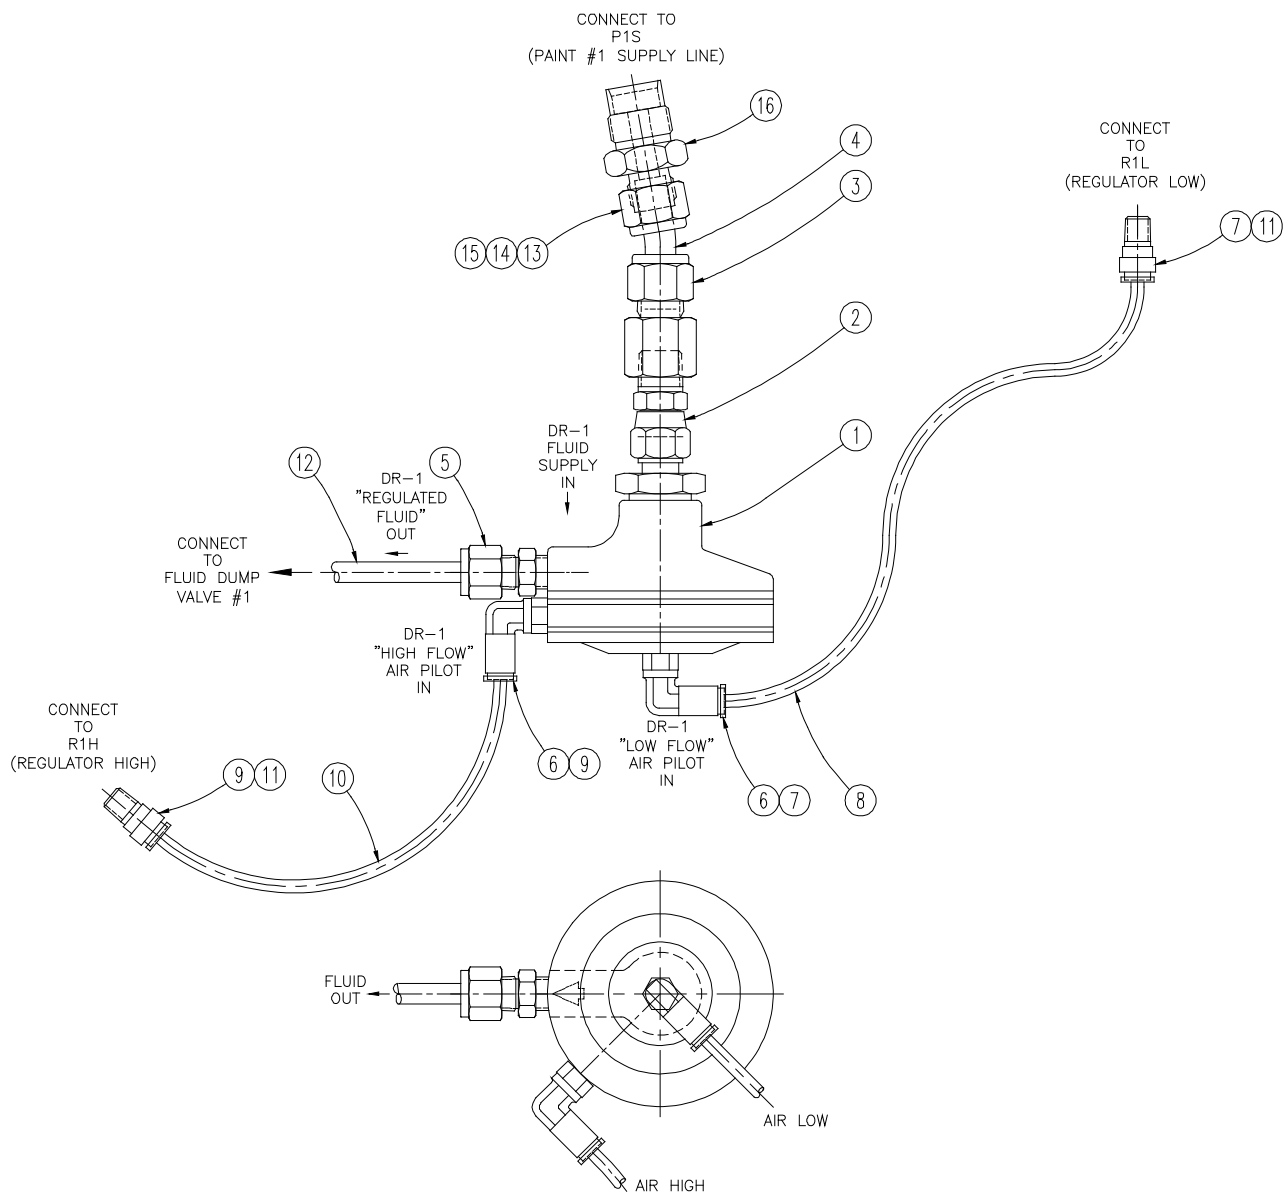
78719-xx Fluid Regulator Assembly, Low Flow, w/Fluid & Air Line Package (Non-Circulating Fluid Return)
